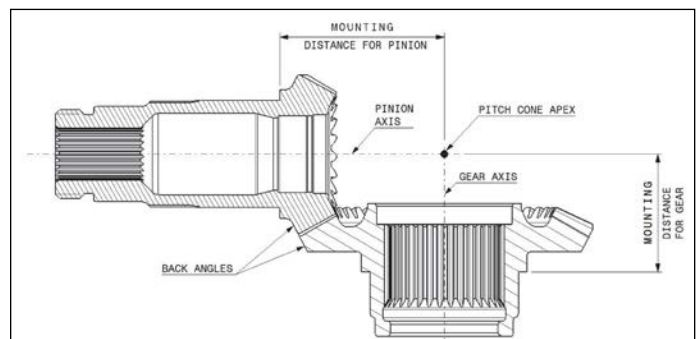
Assembly of a pair of straight bevel gears (pinion and gear).
